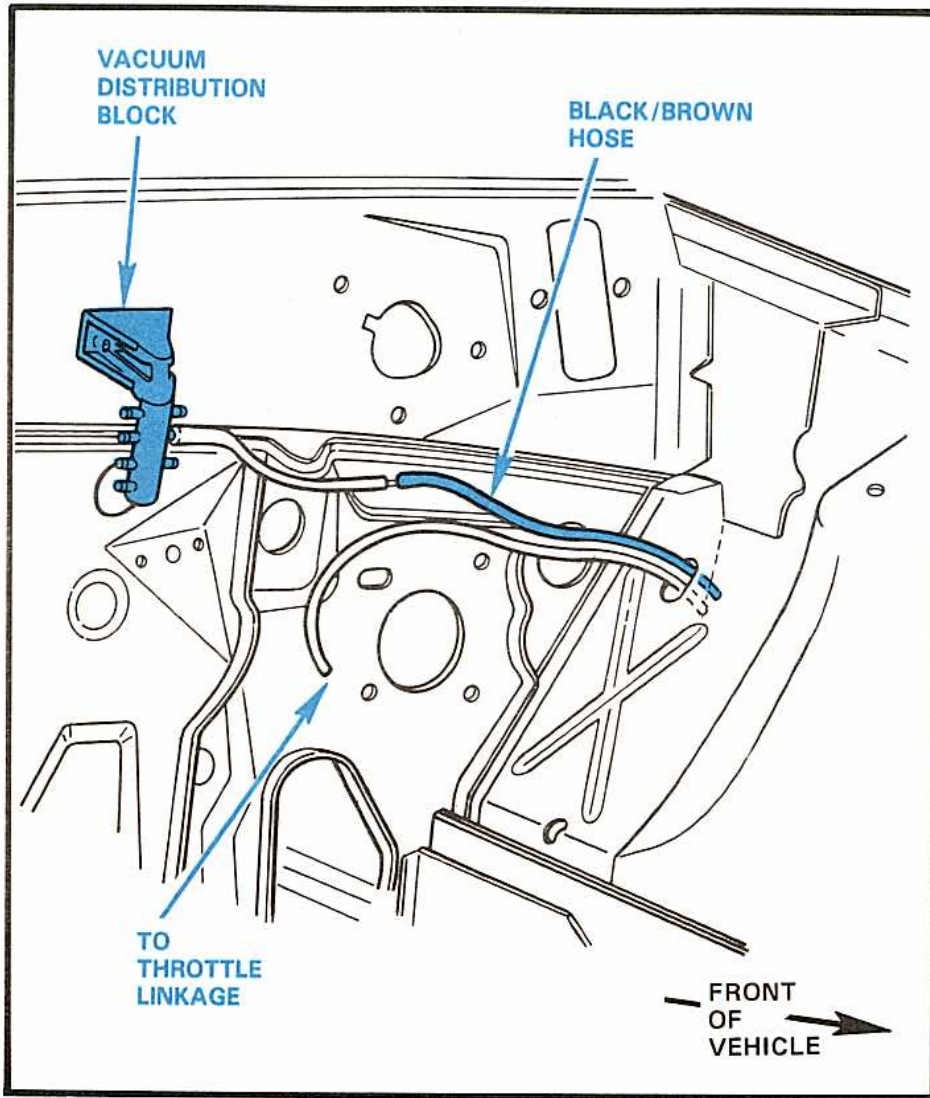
Vacuum Hose Routing — 3.8L and 5.0L Engines
